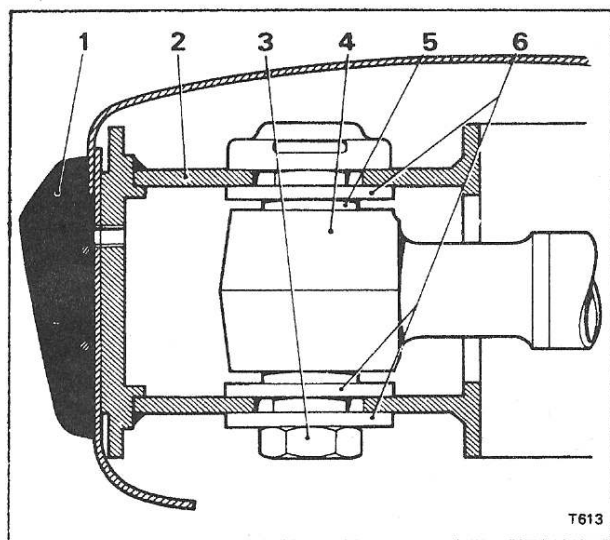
Bumper to adapter/absorber unit mounting arrangement
